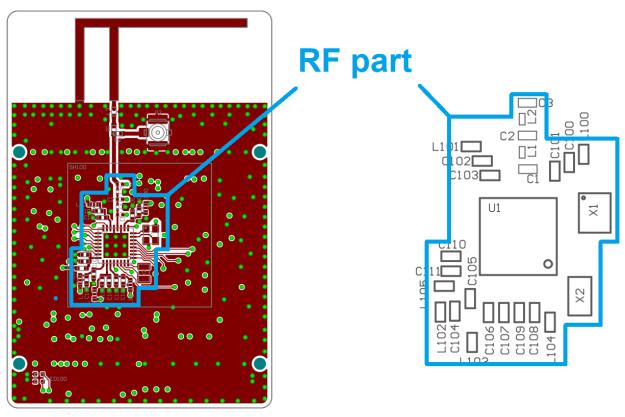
Top Layer of the BRD4180A (EFR32xG21) Radio Board (Left Side) and Assembly Drawing of the RF Part (Right Side)
